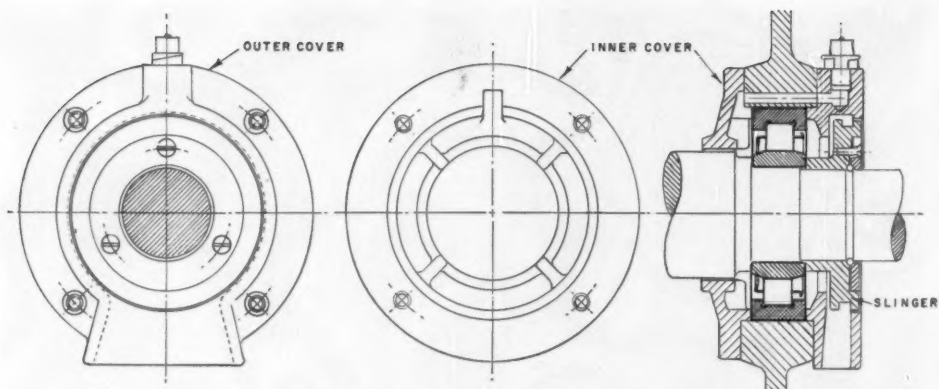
Grease valve in electric motor with end frames (reprinted from SKF brochure TSP 5243²⁸). Note design of bearing housing covers which incorporate radial webs to lead new grease into the bearing.
